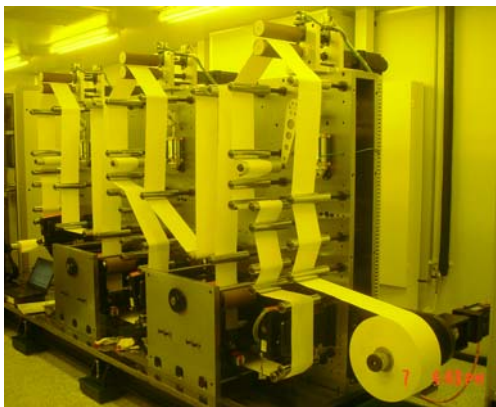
Roll-to-Roll Printing Process Equipment in a Cantilever Structure.
